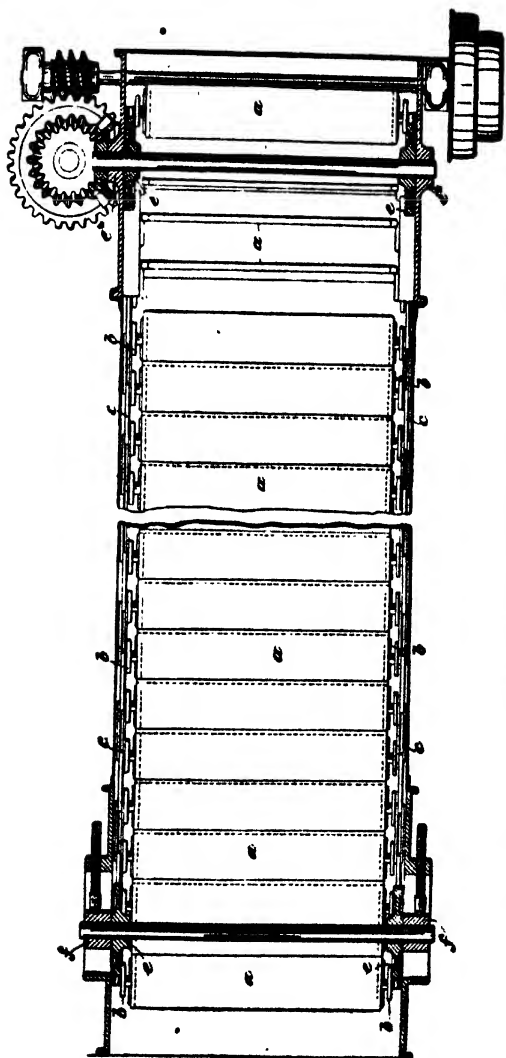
Automatic Down-draught Tea Drying Machine, with Swinging Trays or Plates having V-shaped Arms or Projections (horizontal section).
